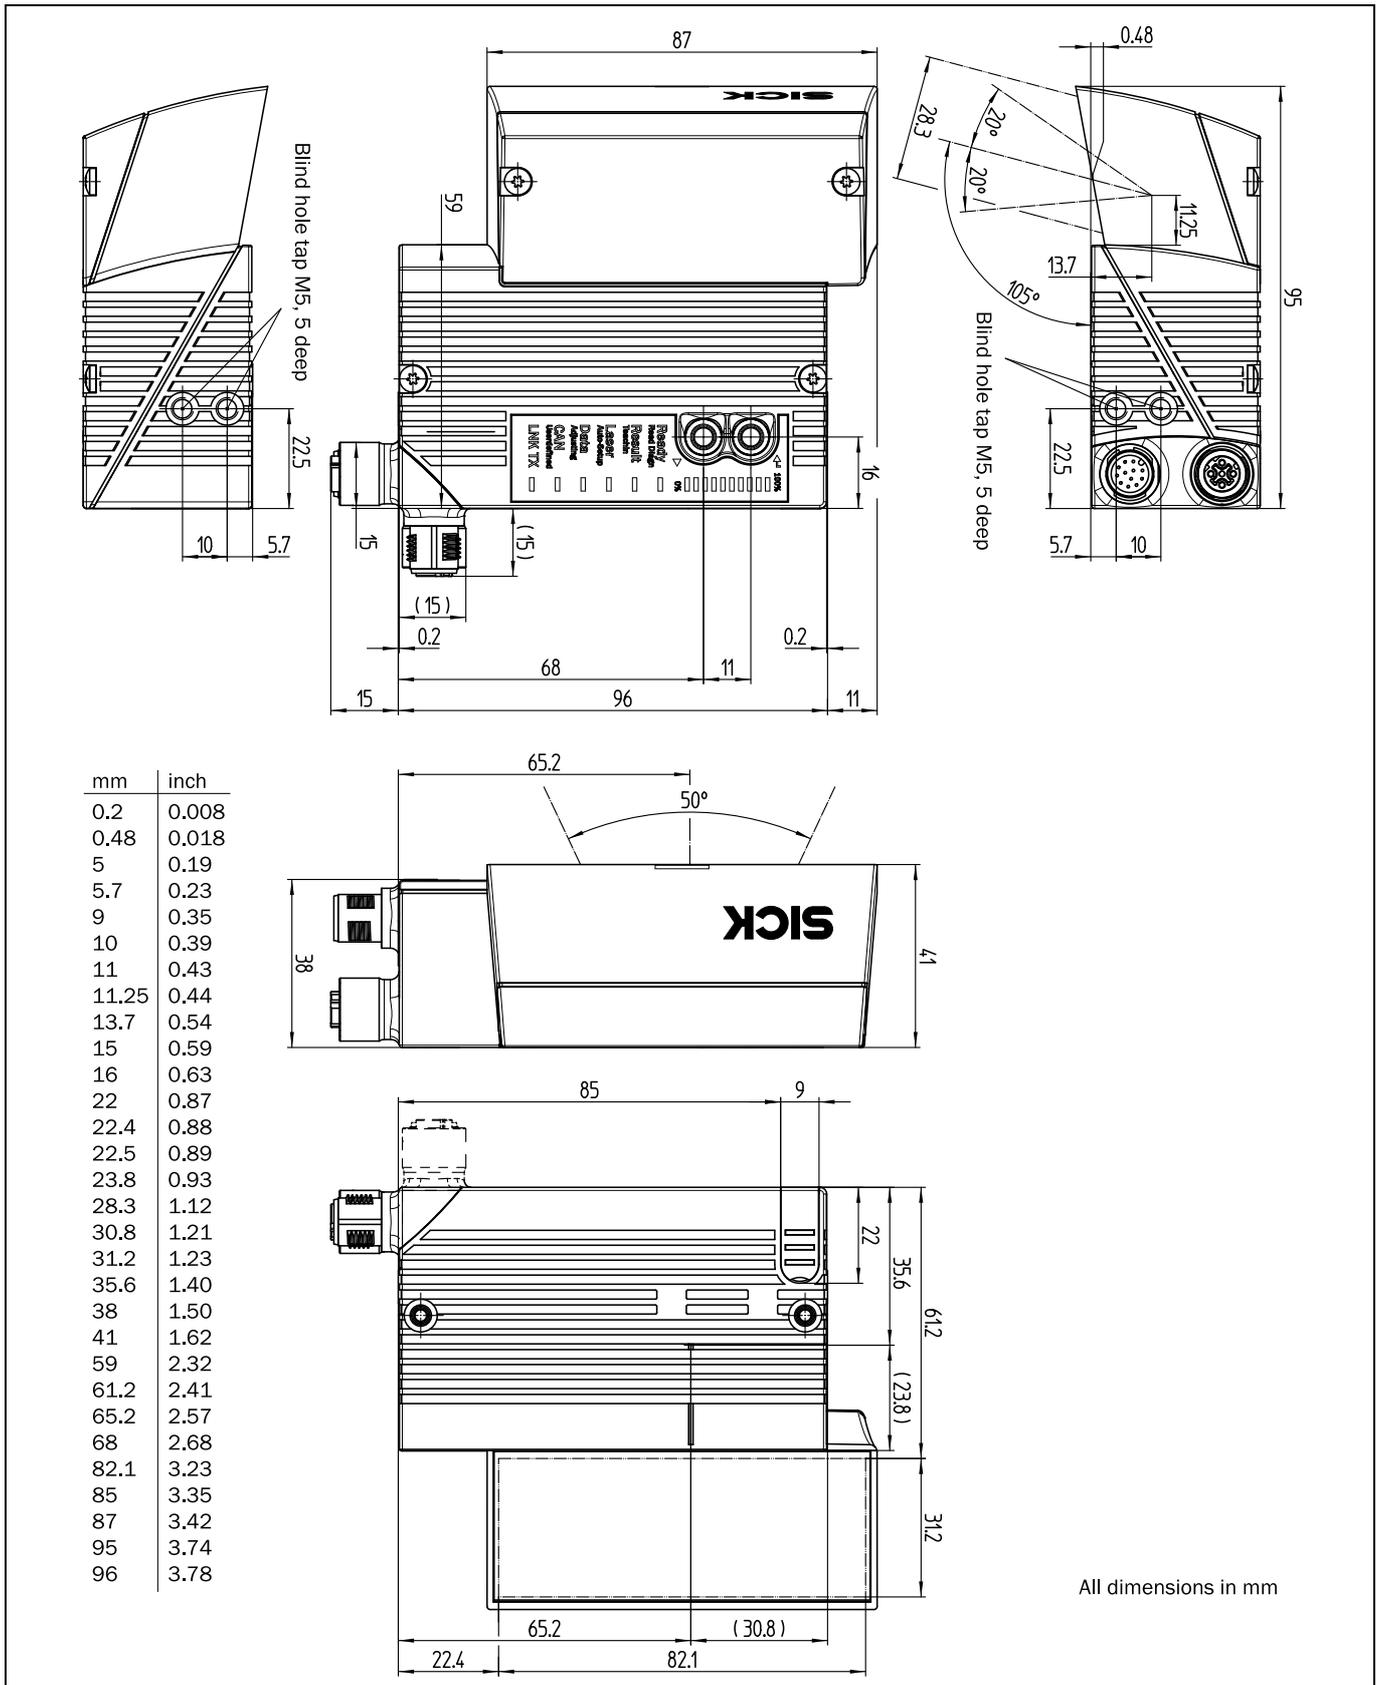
Ethernet version: Dimensions of the bar code scanner with oscillating mirror (CLV65x-6120)
